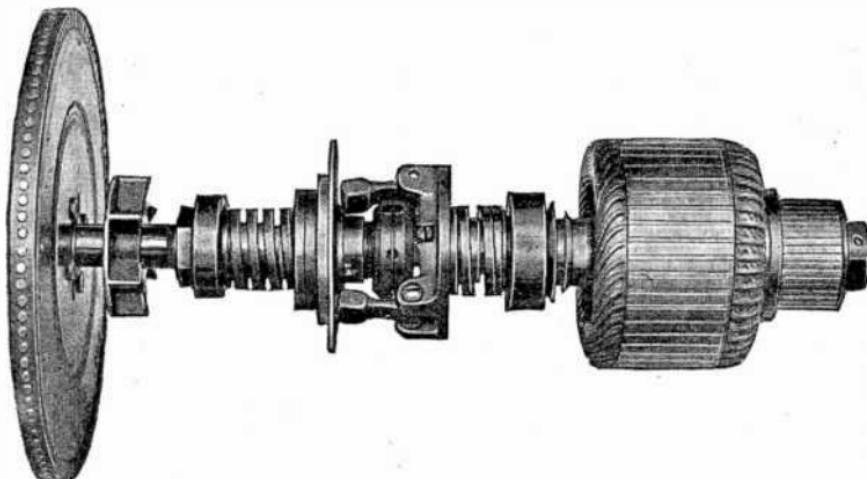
,473.—Keystone rotating element, showing wheel, baffle fan, governor, including oiling disc, safety spring, ball bearings and armature, mounted on the shaft.
